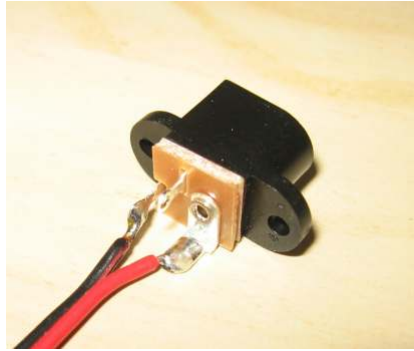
Close-up showing which two tags need to be connected. Note: If you purchased the part-machined case, you will need to flatten the three solder terminals to stop them touching the circuit board when the cover is fixed.
